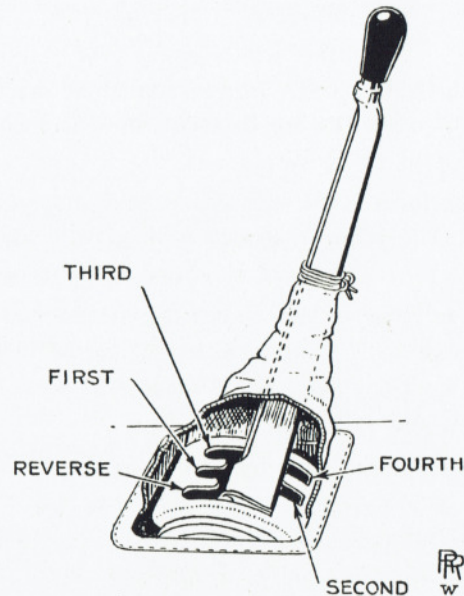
PERSPECTIVE VIEW OF GEAR LEVER GATE.
